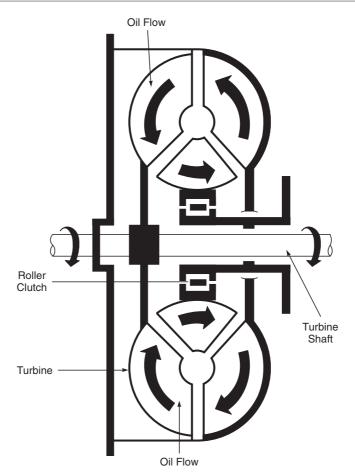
Cross-Section of Torque Converter Showing Oil Flow
